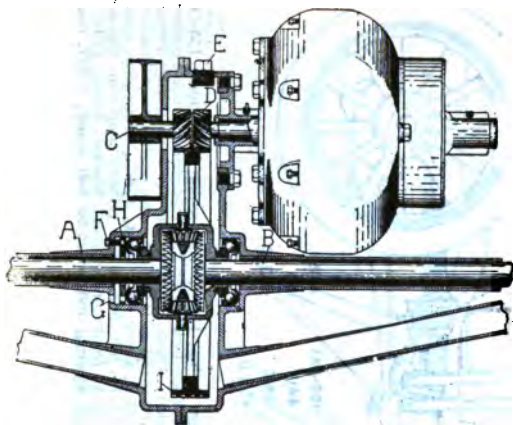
,053.—Single motor attached to rear axle through herringbone single reduction gears
